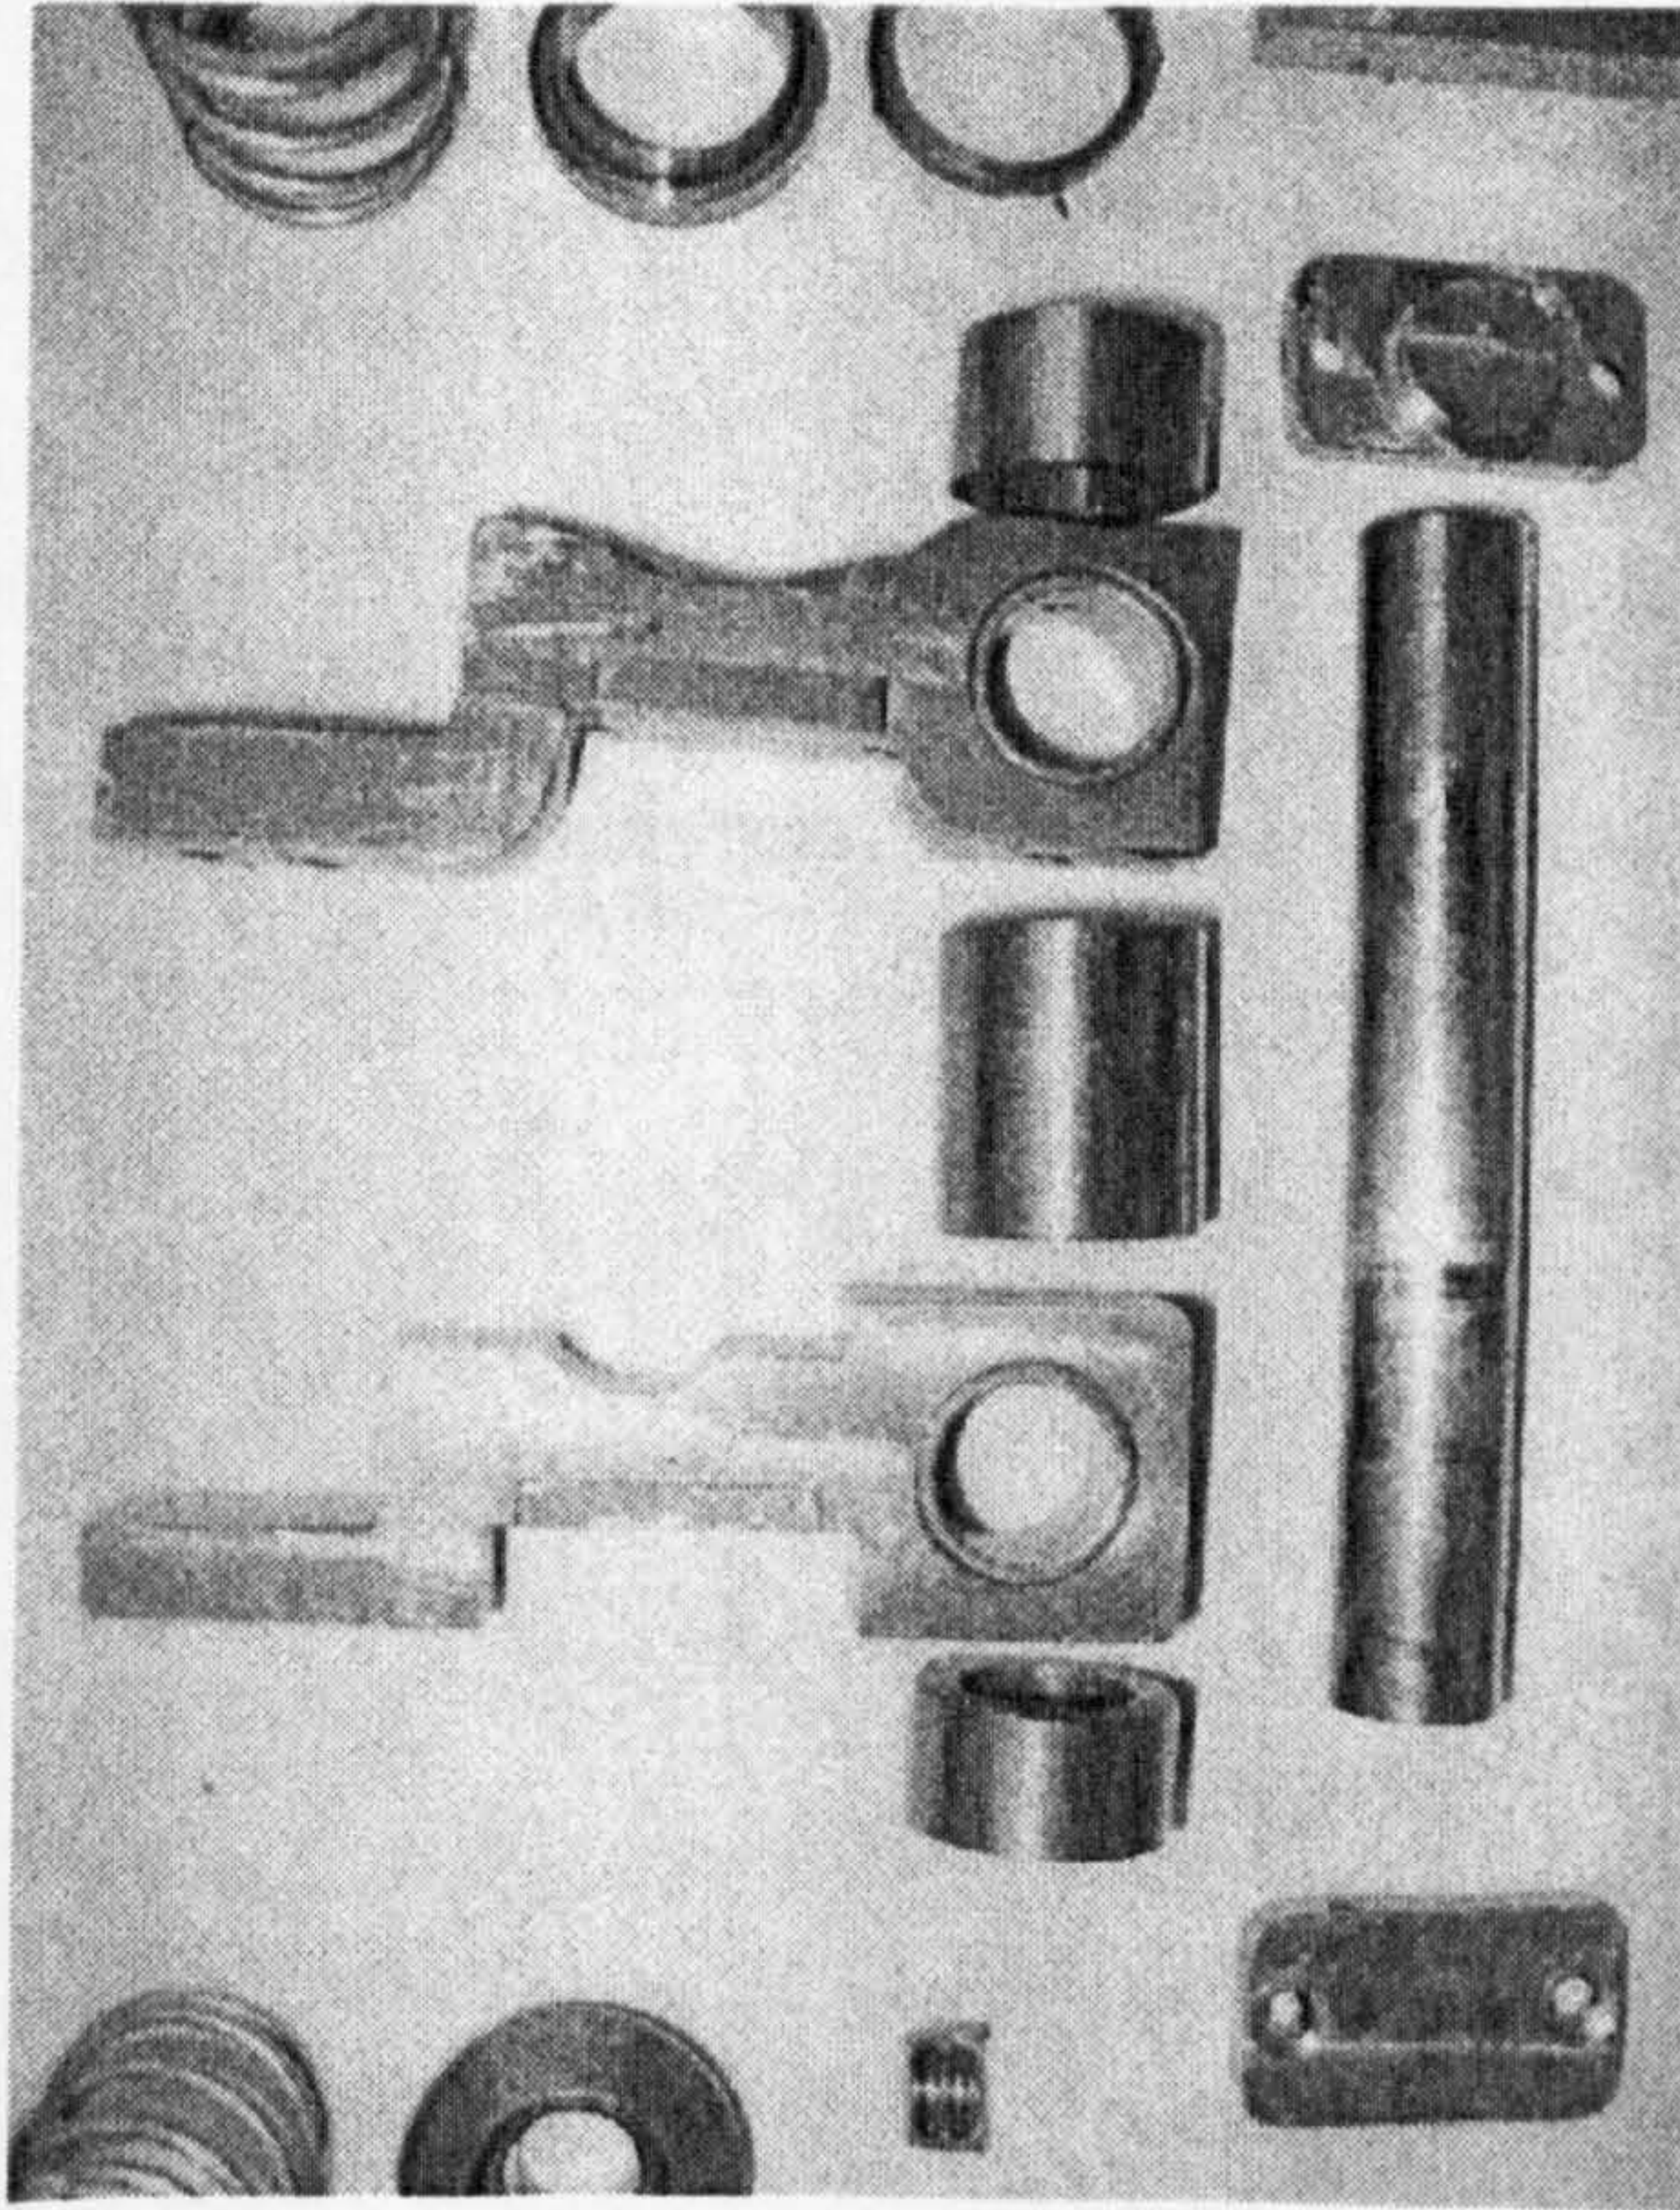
Cam Box, Rocker Arms, and Rocker Shaft
